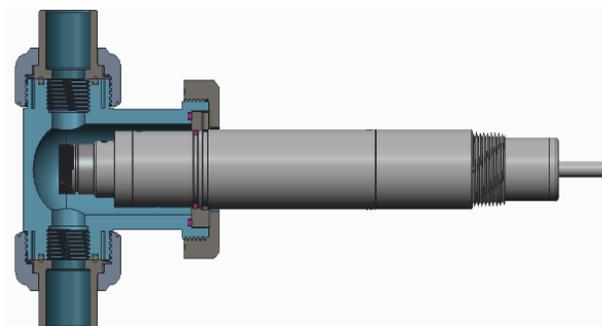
ST-772 in a pipeline installation using ST-001 inline Tee Assembly
